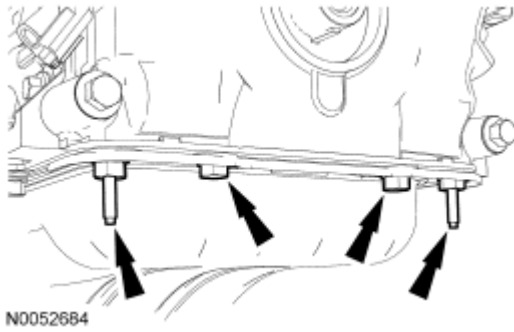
Locating Oil Pan-To-Engine Front Cover Bolts & Oil Pan-To-Engine Front Cover Stud Bolts
